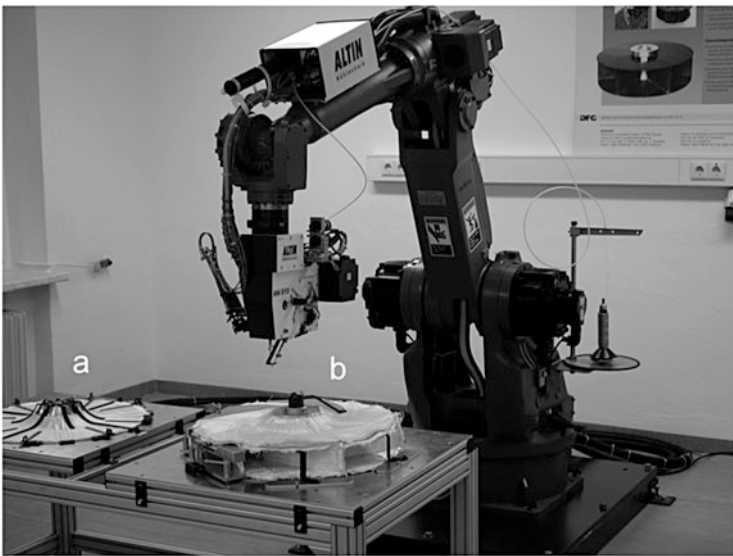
Sewing robot with production tools for (a) the pre-assembly of the rotor cover, and (b) assembly of the upper blade edge and rotor cover of the rotor demonstrator II by DFG-FOR 278 [6]
